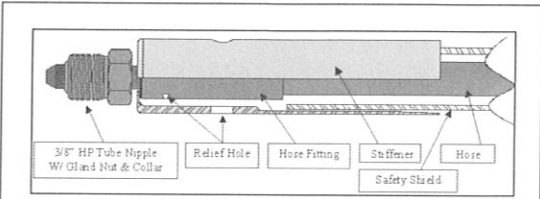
Basic design of a 40,000 and 55,000 psi hose assembly with safety (burst) shield and stiffener. (Also, pictured on the cover.)
